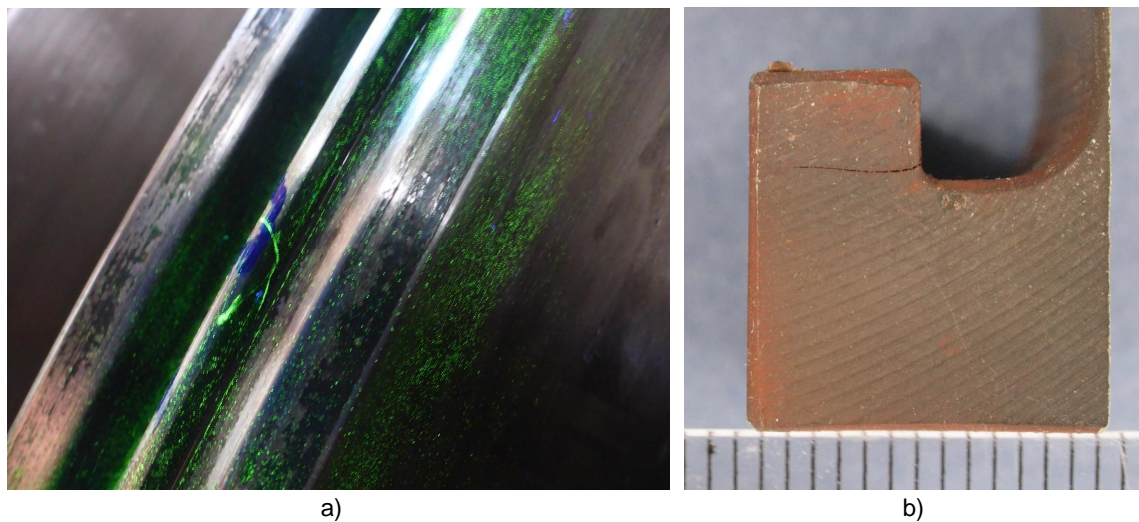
Cracks in a) the rim of a rotor disk and b) root groove of blade (108)
